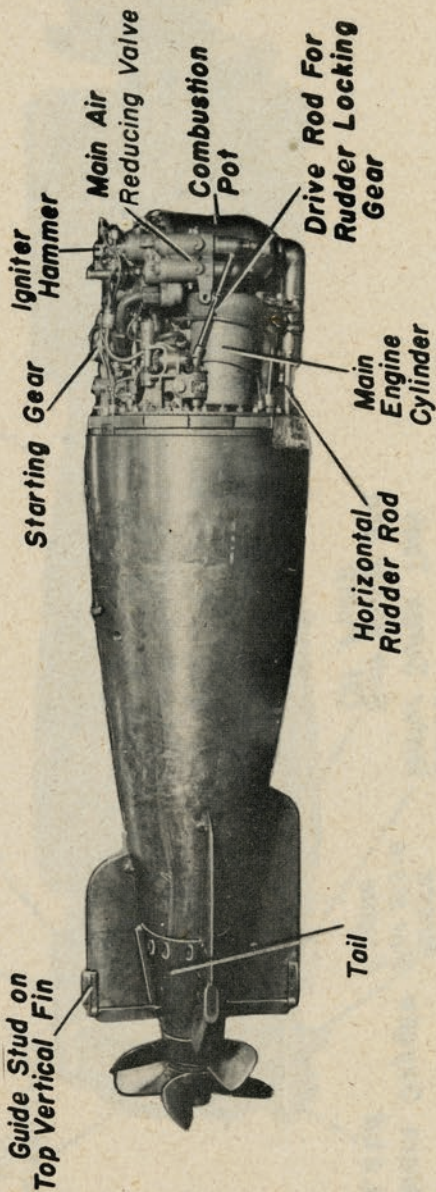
Torpedo Type 97, Afterbody, Starboard View
